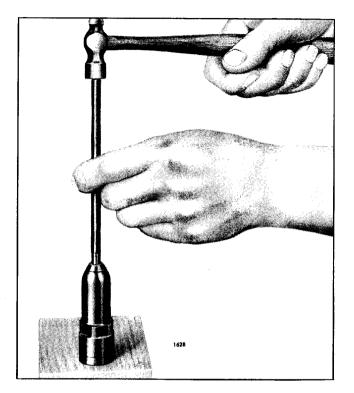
Removing Spray Tip from Injector Nut using Tool J 1291-02
